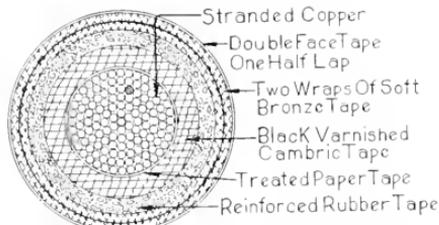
Cable Similar to That Shown in Fig. 8, Except for an Additional Rubber Jacket to Protect It from Water
